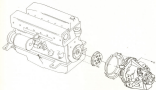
FIGURE FORMER GEAR AND MOTOR UNIT
